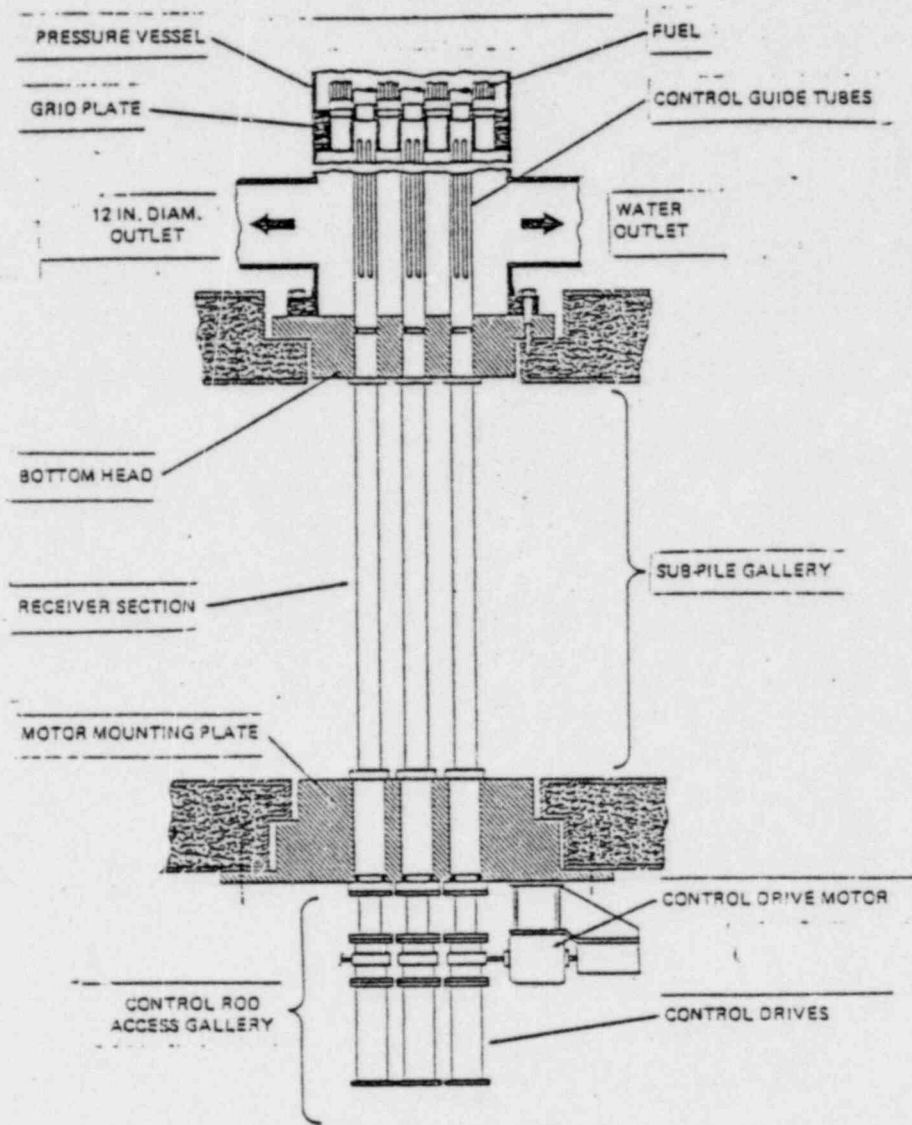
CONTROL ROD DRIVE ARRANGEMENT
